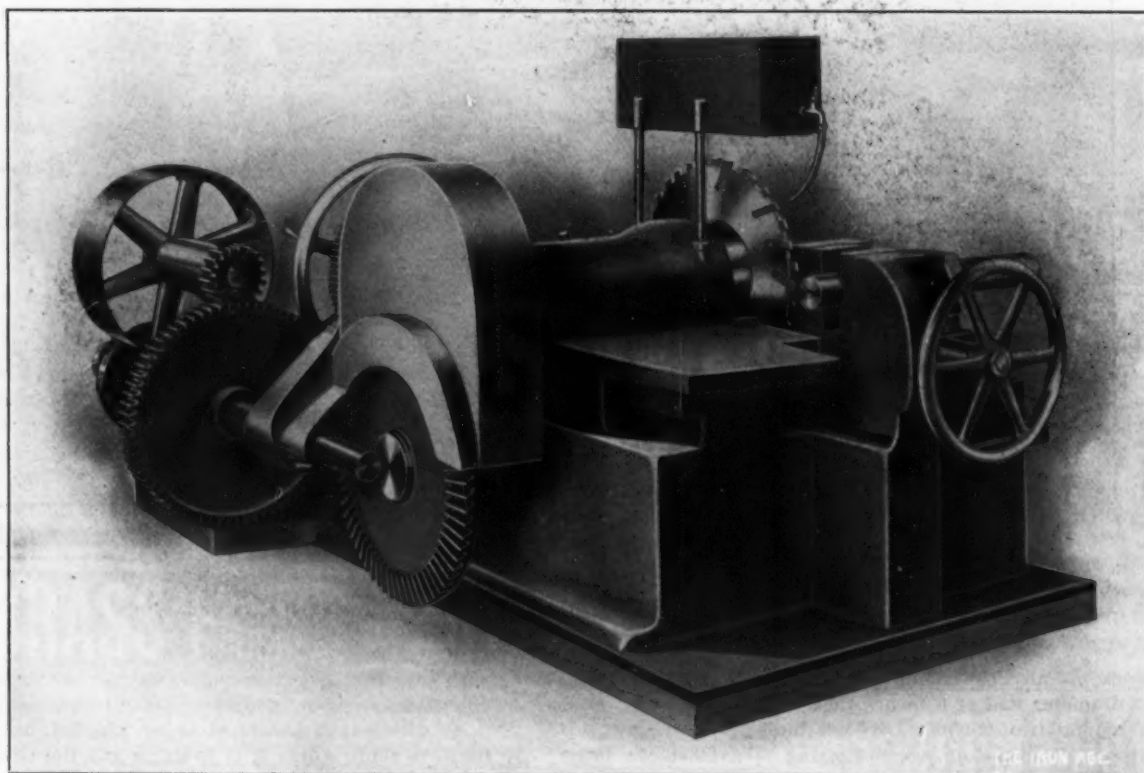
Front Side View, Showing Saw Driving Gearing.
